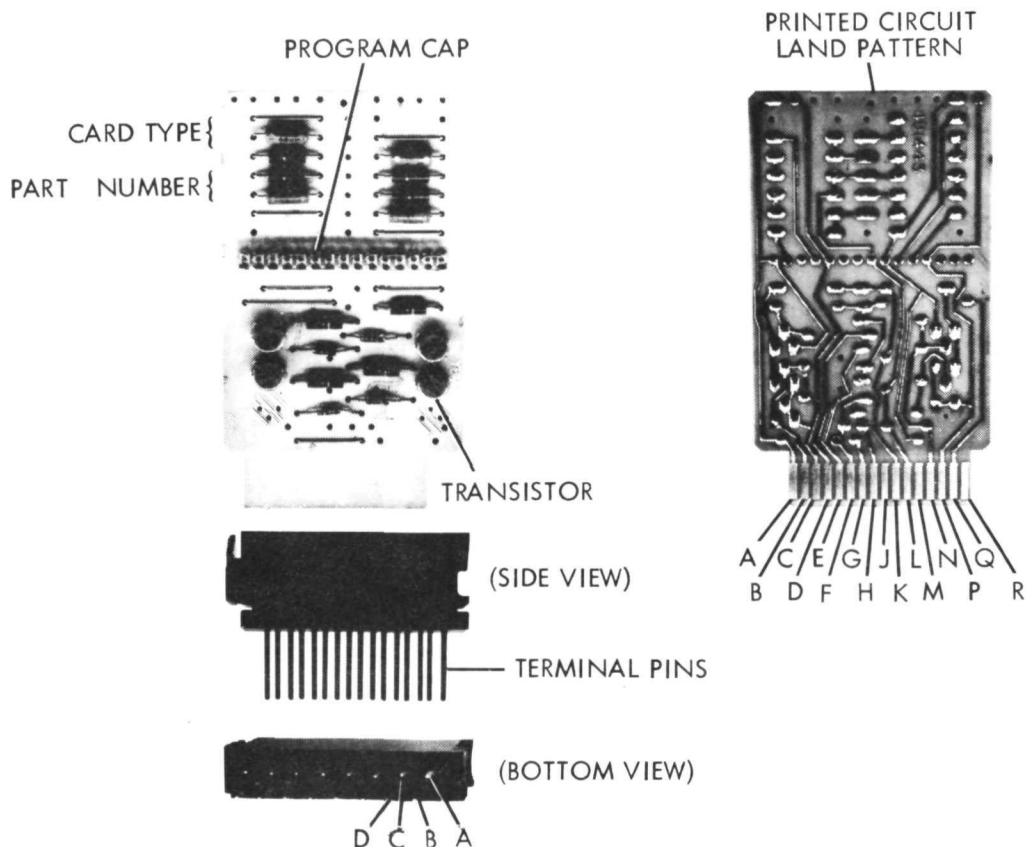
SMS Printed Circuit Card and Single-Position Receptacle
